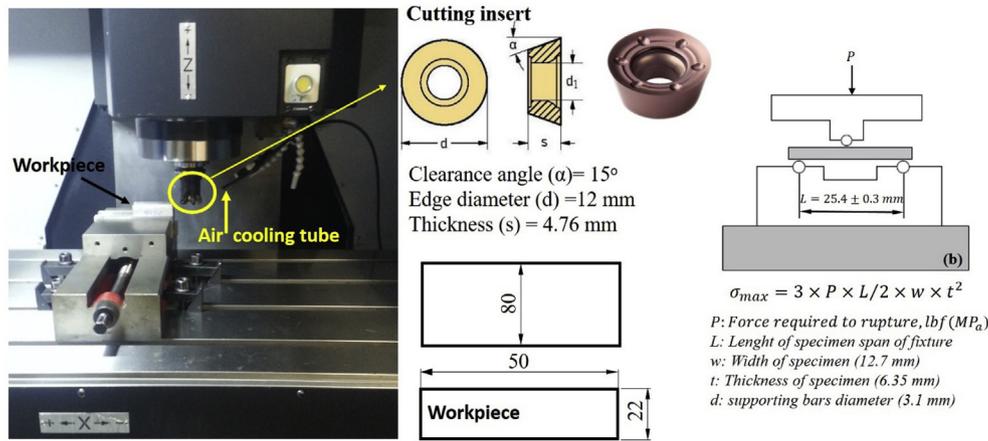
Setup for milling and specifications of cutting insert (a), and the transverse rupture strength apparatus (b).
